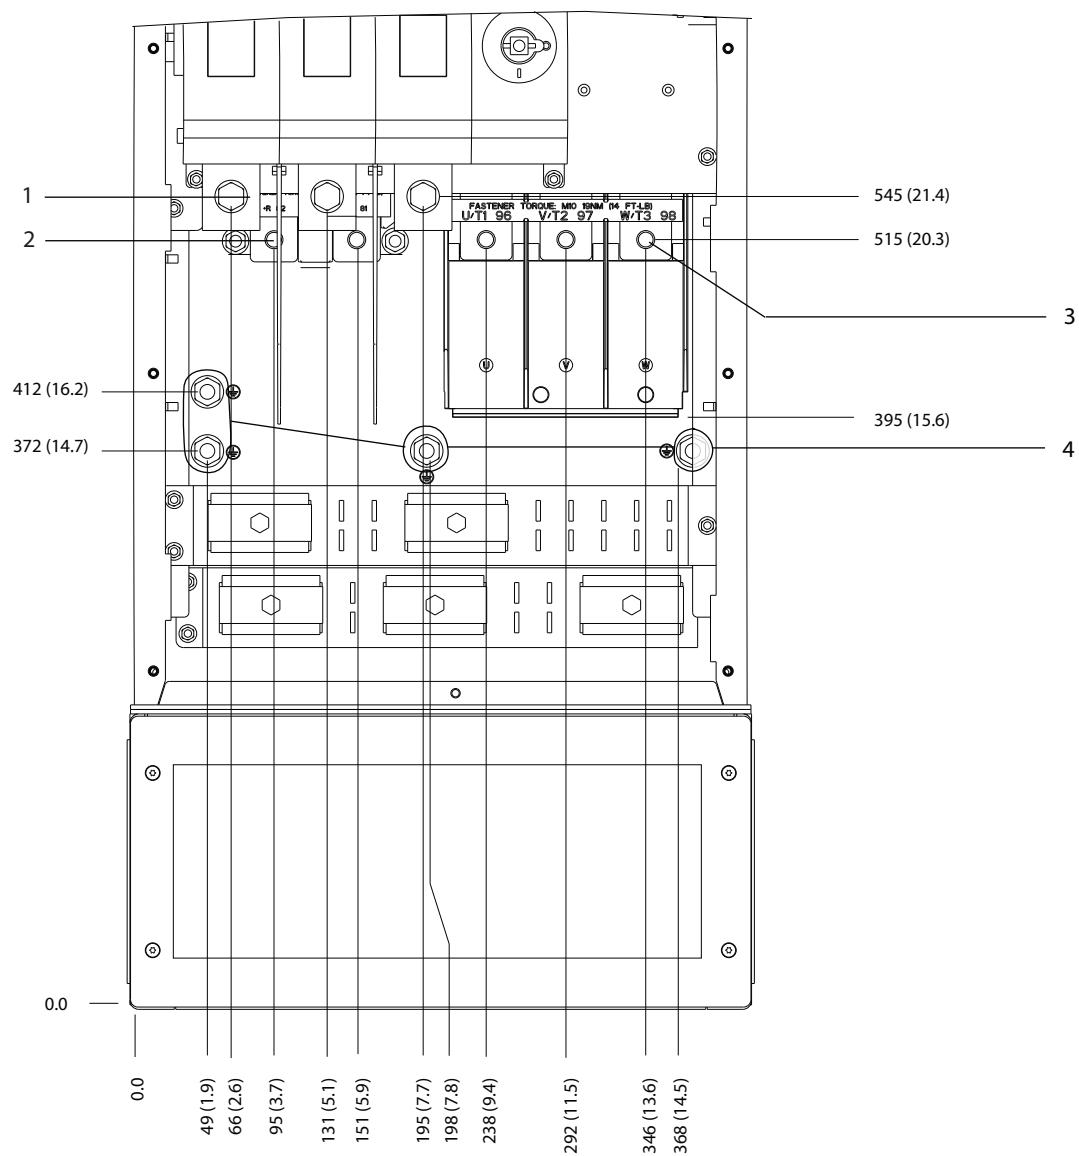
D6h Terminal Dimensions with Circuit Breaker Option (Front View)
